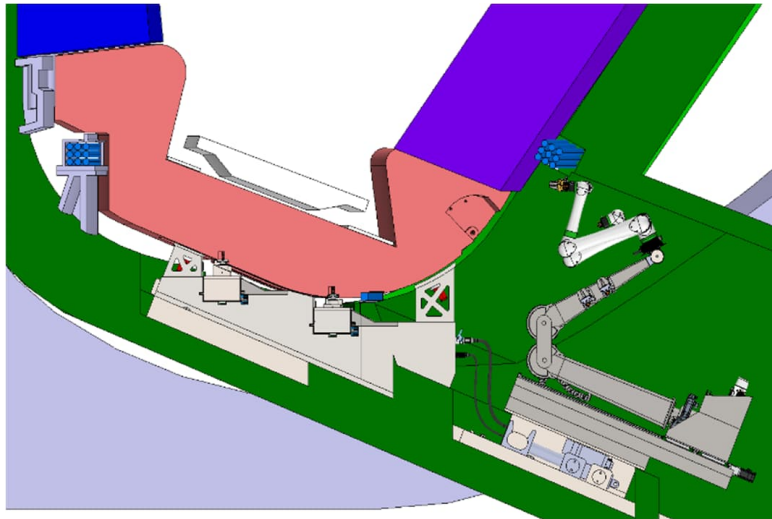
Lower port Multipurpose Deployer for divertor tool handling mounted on the Serapid chain mover and End effector concept (Courtesy of VTT & Comatec).
